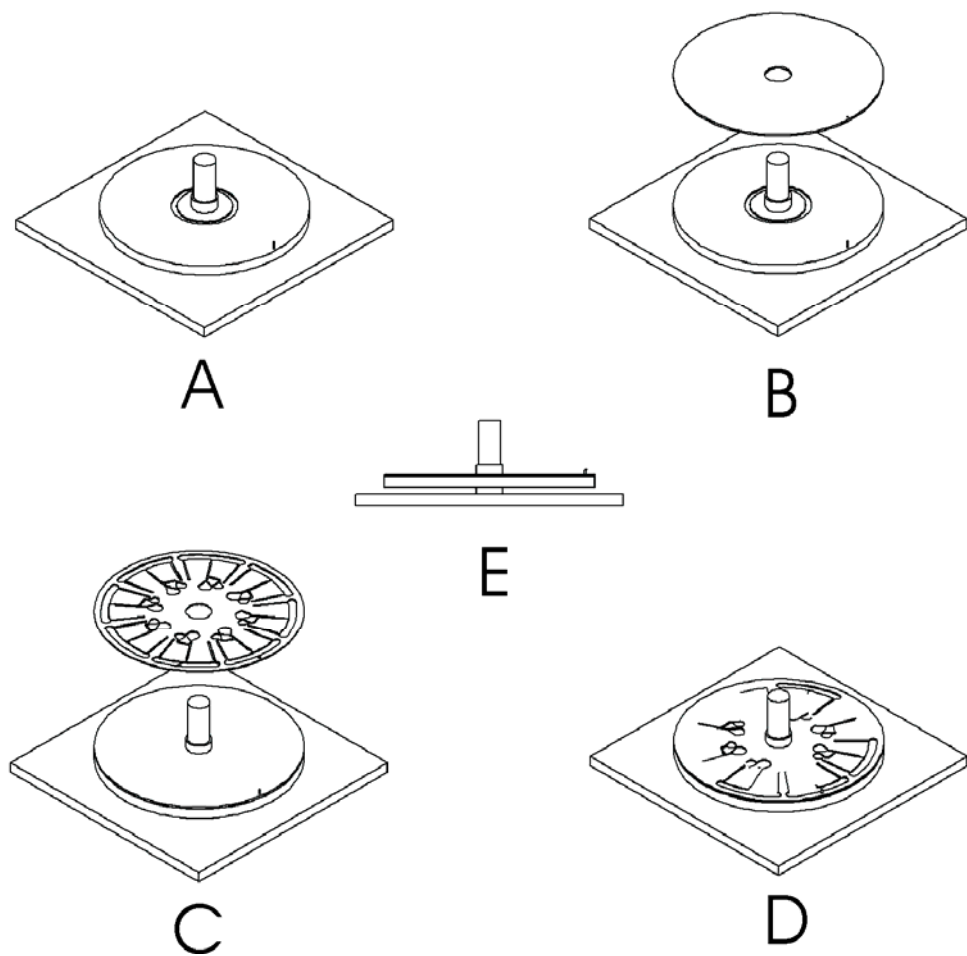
Device assembly. (A) Alignment stage. (B) Insertion and alignment of the base disc. (C) Insertion and alignment of a layer of adhesive. (D) Disc layer and first adhesive layer are assembled and aligned together, ready for a third adhesive or disc layer to be added. (E) Side view of the stage and assembly.
